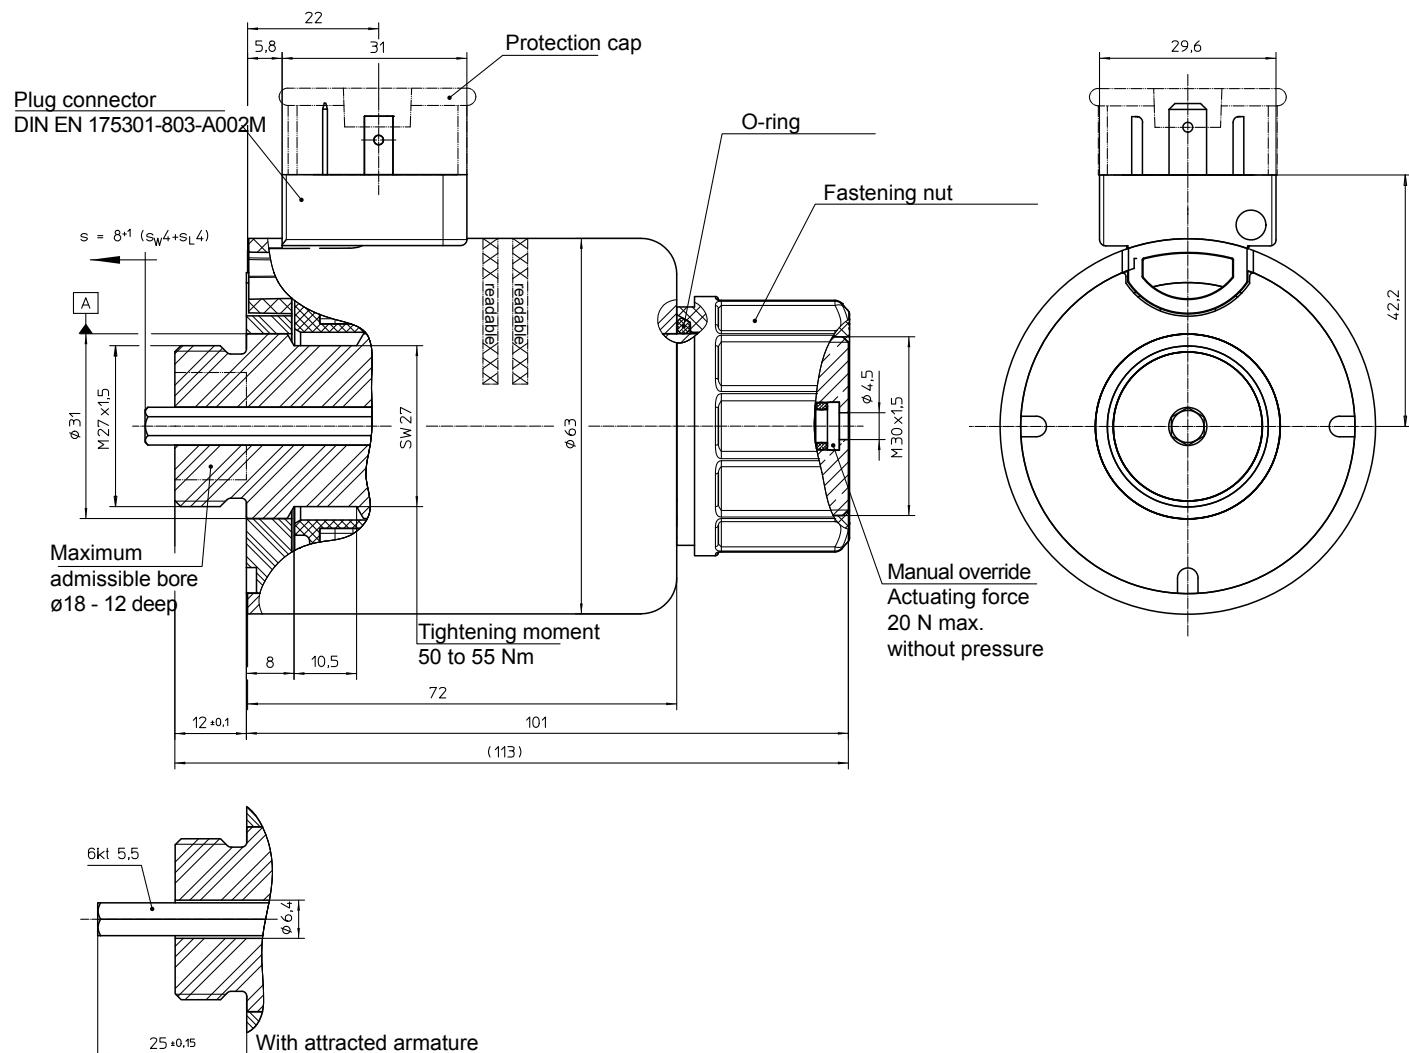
Dimensional drawing to Type G HP Y 063 N54 A01
